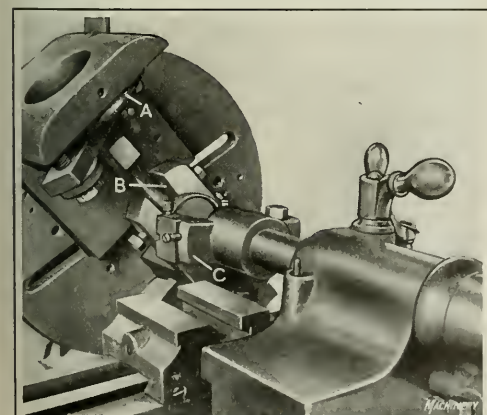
Lathe Set-up for machining the Stand to receive the Gage Head
